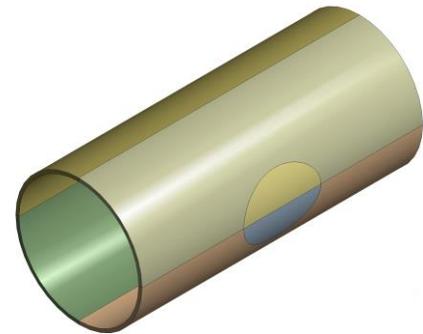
Hydrogen Manufacturing Unit Transfer Header Model
